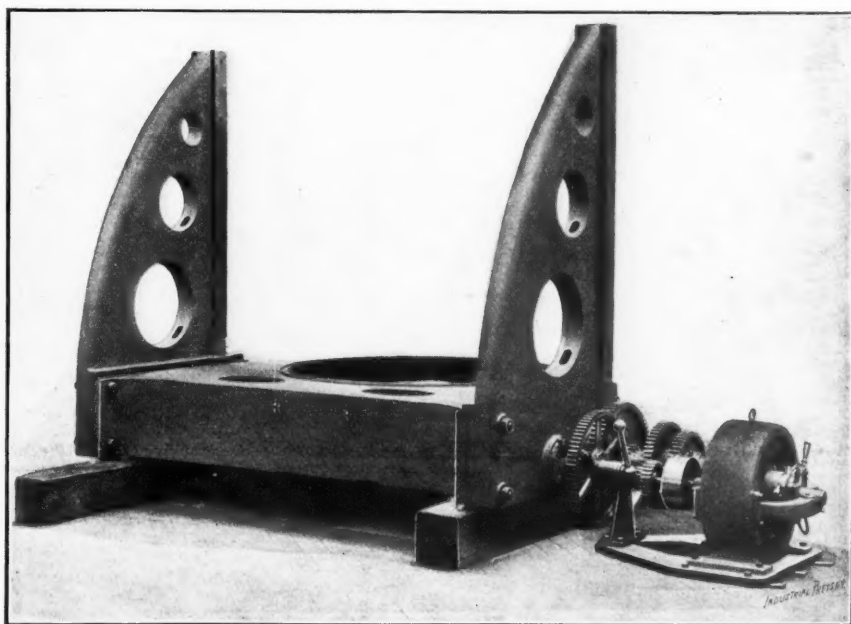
Ten-foot Boring Mill, partly completed, Driven by Variable Speed Motor.
